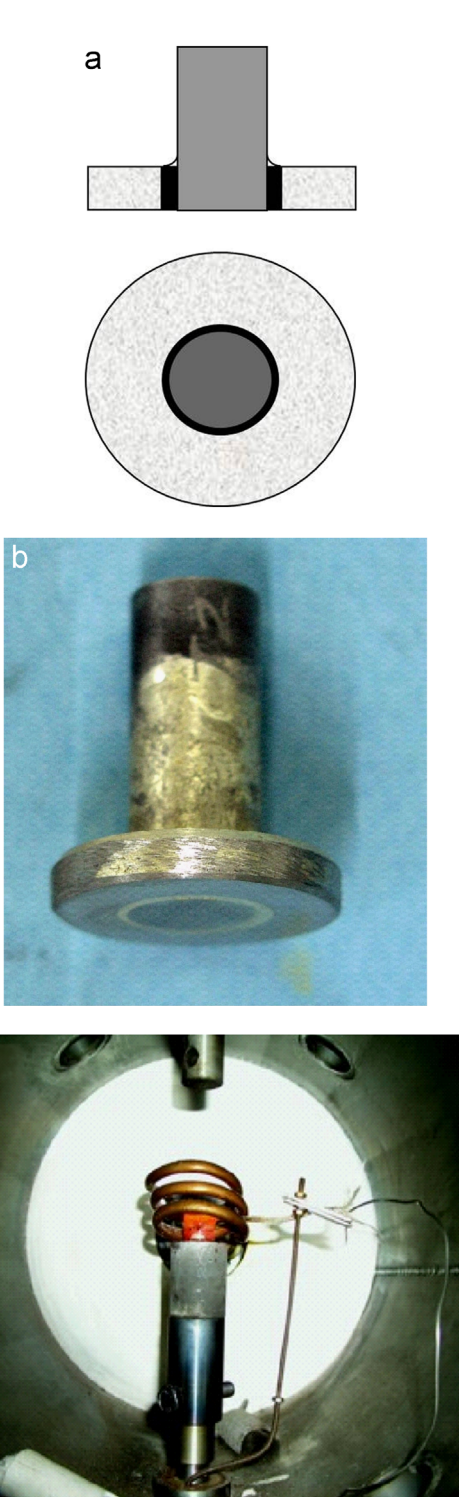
(a) Schematic illustration of the test assembly before joining, (b) WC-10Co/BAg-5/90MnCrV8 brazed joint and (c) Image of brazing device.
